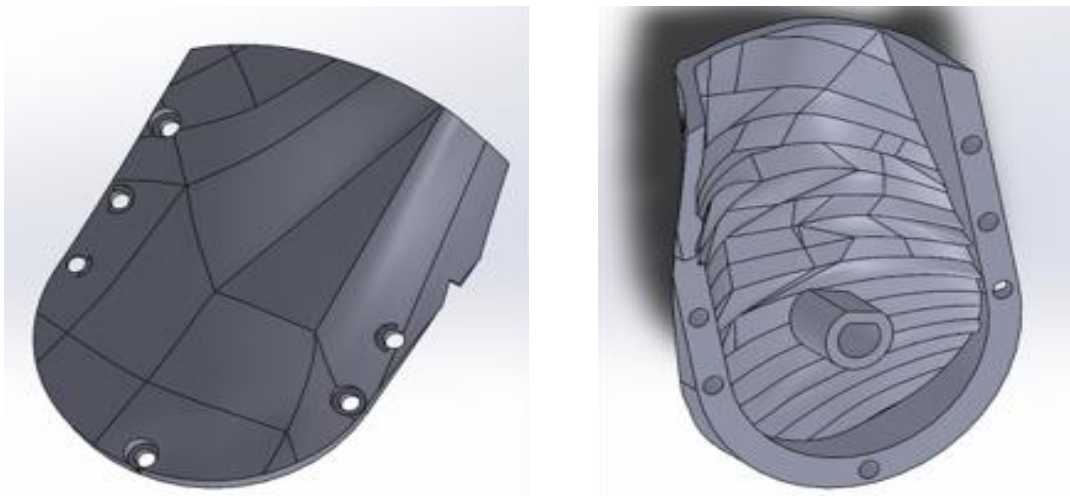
Exterior view of internal mounting boss (left) and internal view of interior mounting boss (right)
